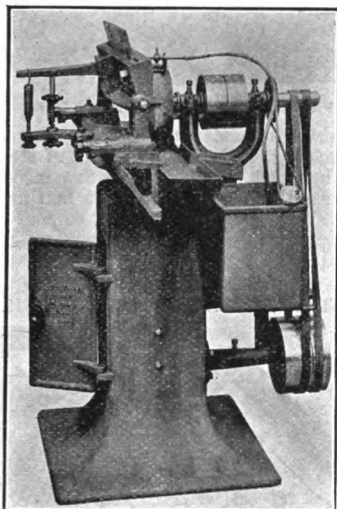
AUTOMATIC KNIFE GRINDER FOR TOBACCO KNIVES.
